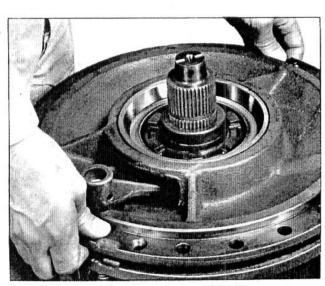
Carrier Plate (Diff. Lock) Removal or Installation
